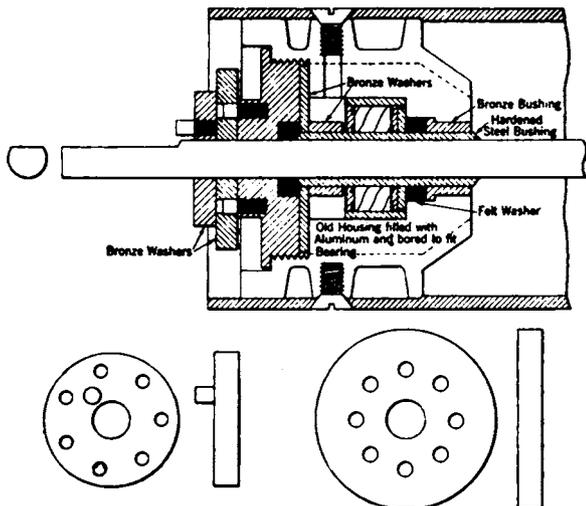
Original Pantograph Roller Housing Modified and Fitted with Roller Bearing
